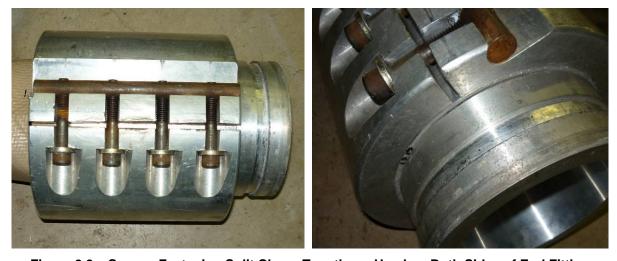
Screws Fastening Split Clamp Together - Used on Both Sides of End Fitting
